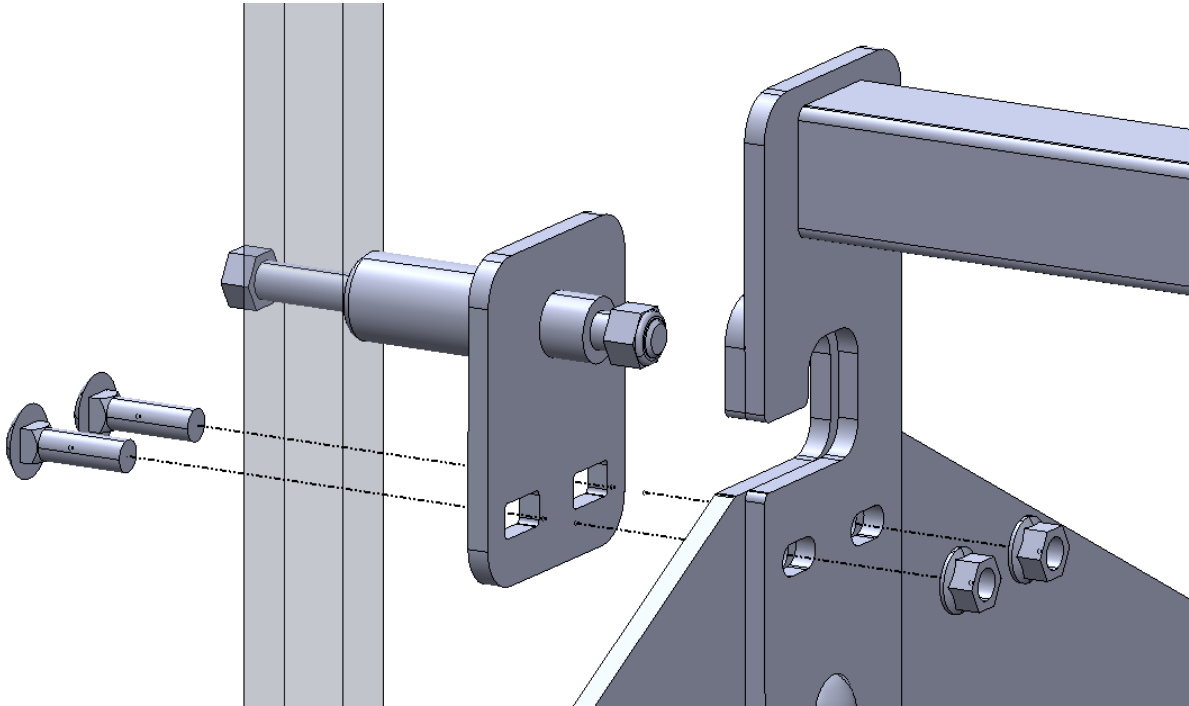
EXPLODED VIEW OF THE TWO HALVES OF THE SHELF-CHAIN CONNECTION SUBASSEMBLY AND THEIR FASTENERS.
